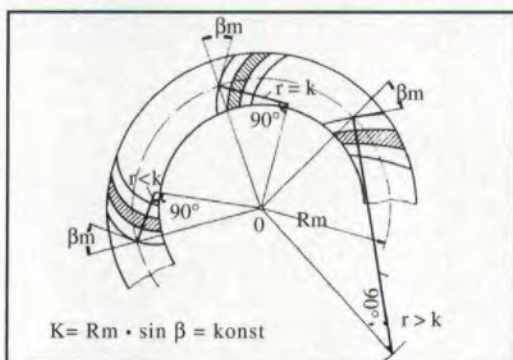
Arrangement of bevel gear and cutter in a "right-angled case."
